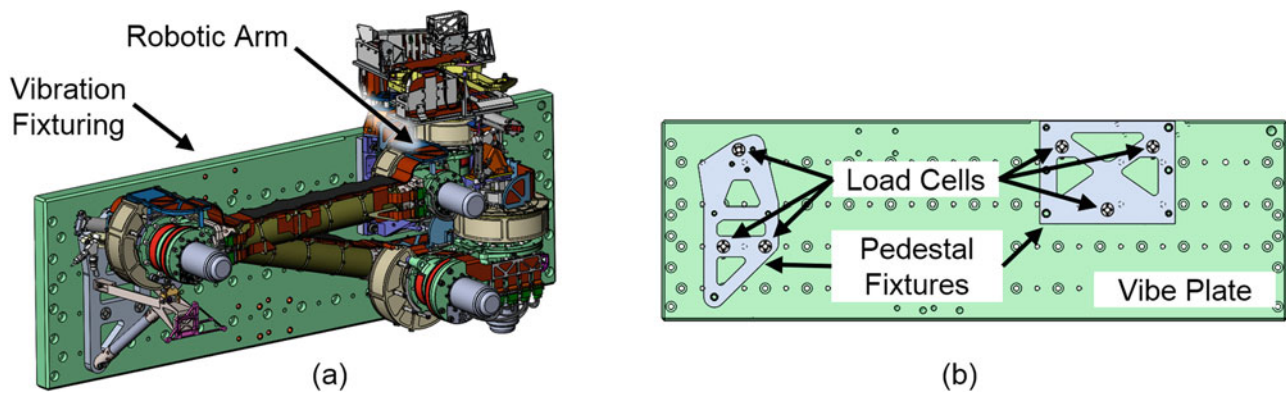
CAD models of the (a) test configuration and (b) vibration fixturing
